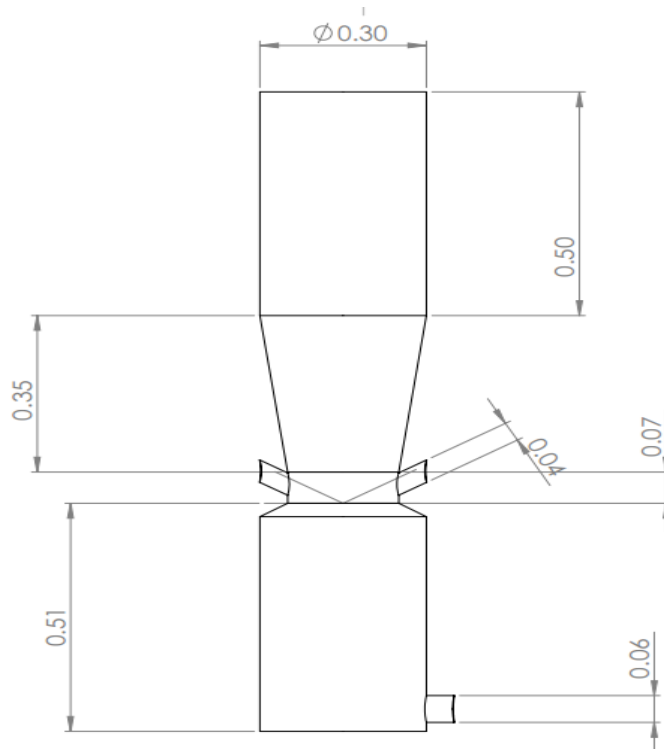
Front view of downdraft gasifier (all dimensions in meters)
